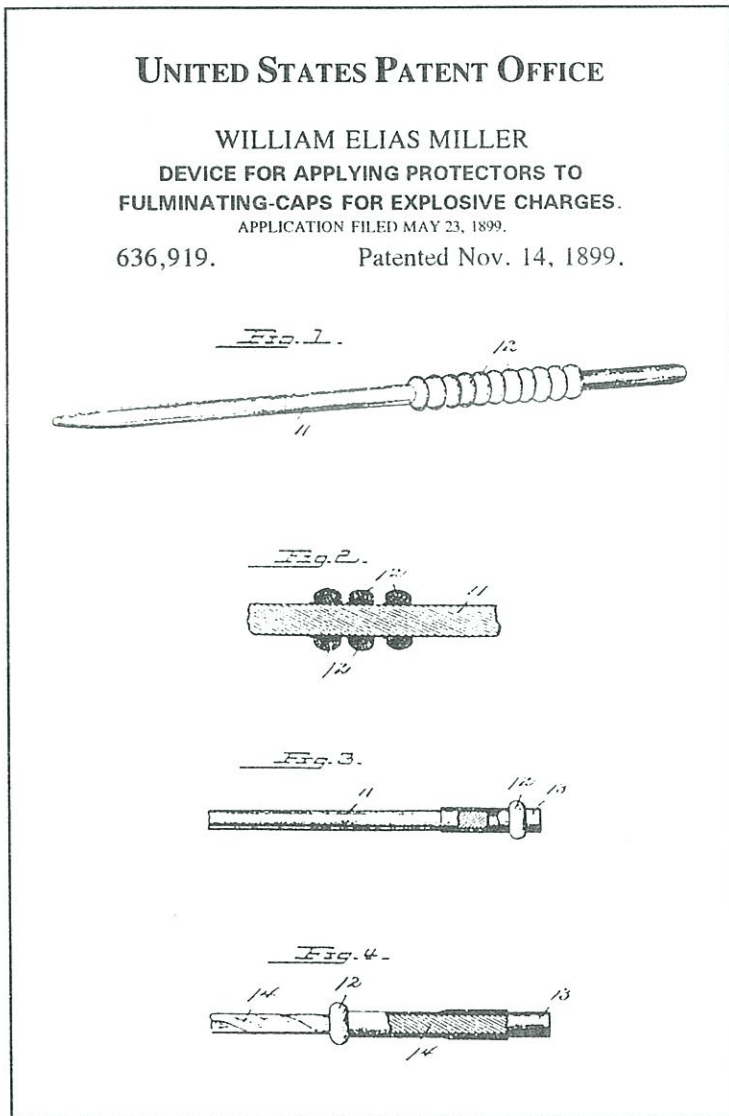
The patent drawings for William Miller's blasting cap protectors patented in 1899.
